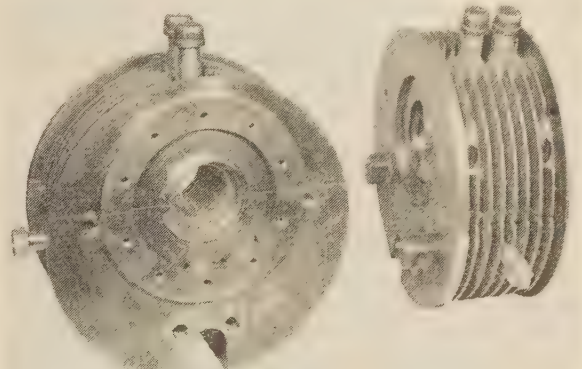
HOUSING FOR FORCED-VENTILATED OIL-RING JOURNAL BEARING
